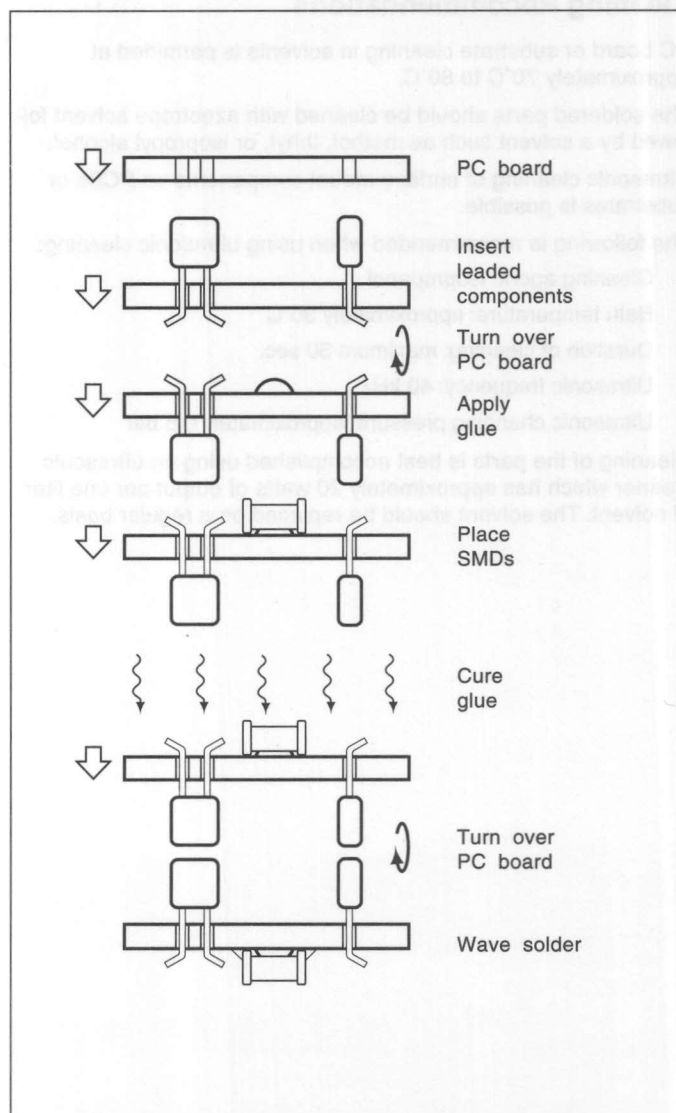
Wave Soldering PCBs With Both Surface Mount and Leaded Components
